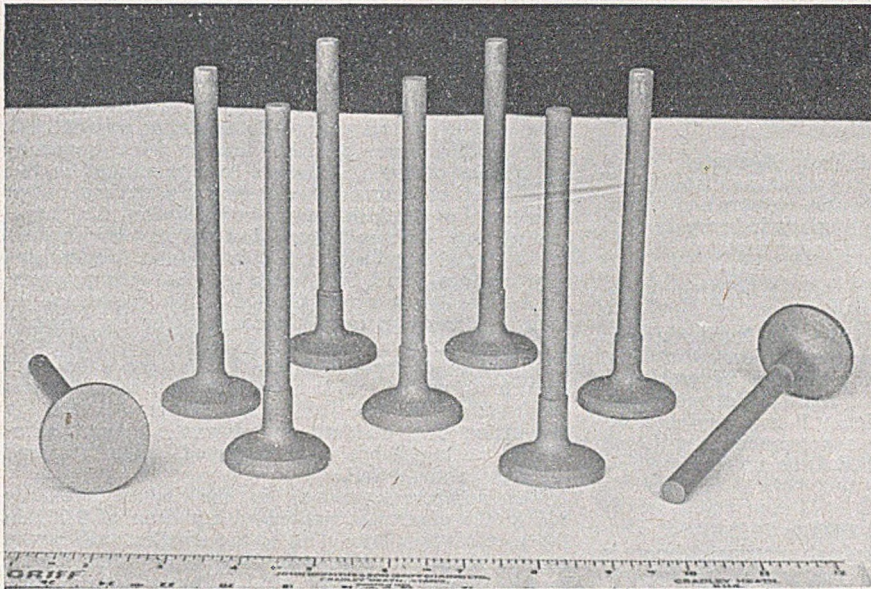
Shell - moulded Heat - resisting - steel Automobile Valve Castings.
